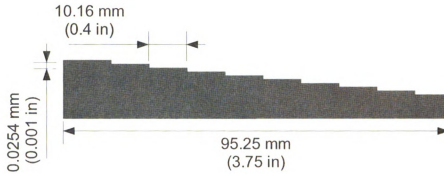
Schematic of the milling steps taken for one notch of the machine aluminum plate.
